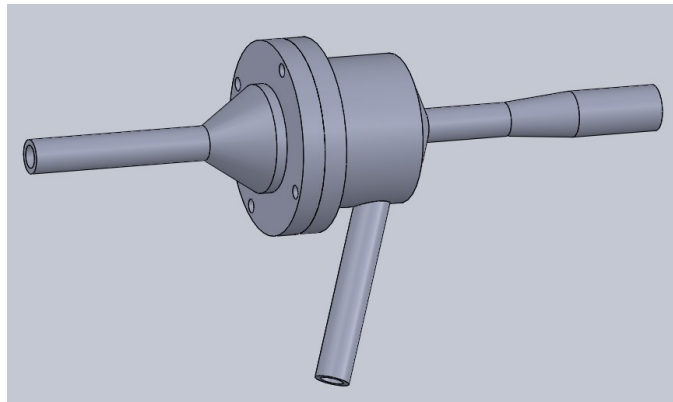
Assembled multi-nozzle ejector CAD model.
